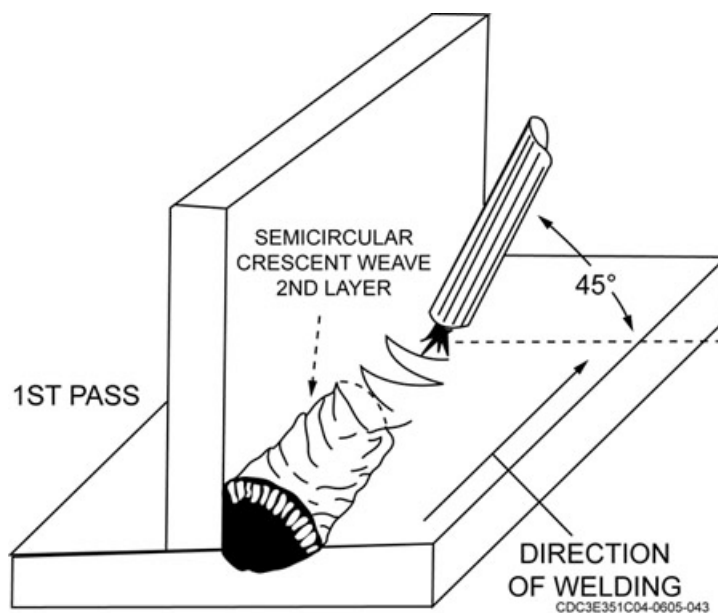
Multiple pass fillet-weld weave motions (horizontal position).
